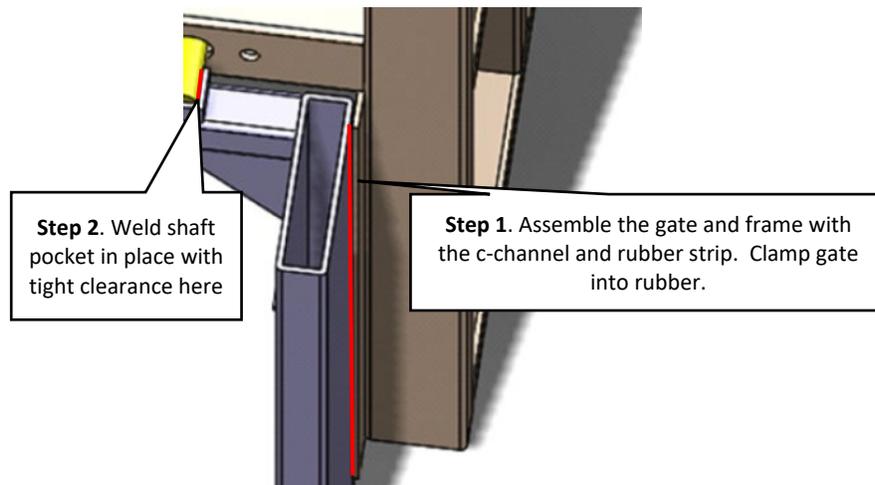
Test fitting the seal and gate prior to welding the shaft pockets. Rubber strip and c-channel not shown.
